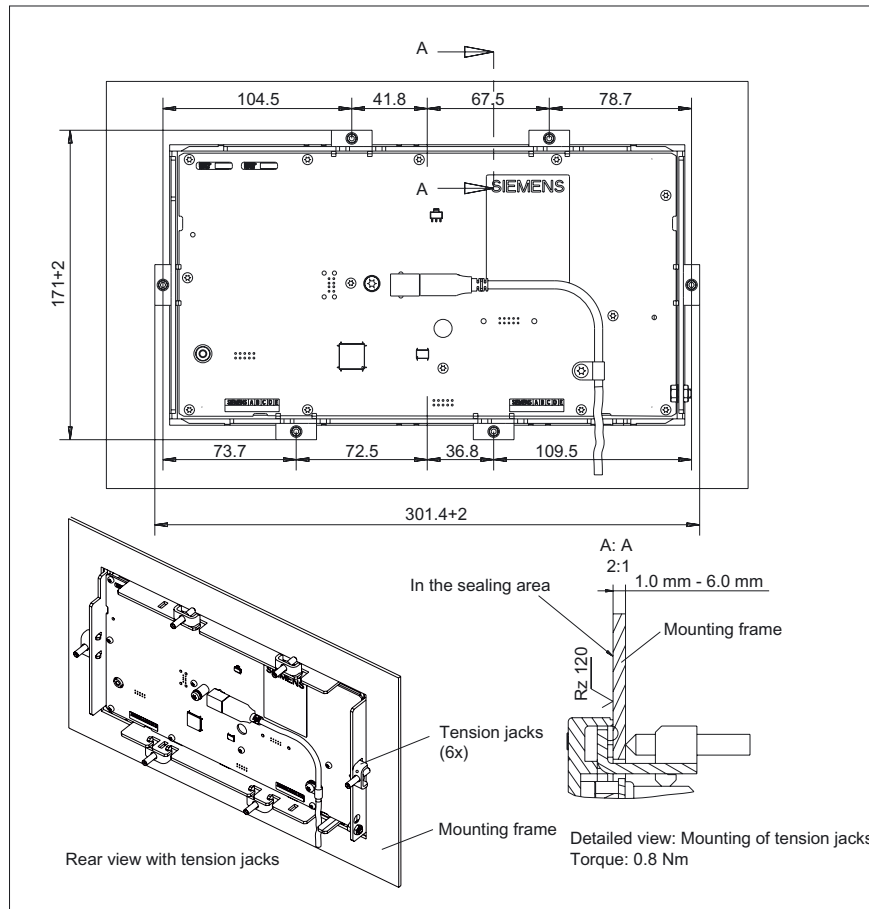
Dimension drawing for mounting the CNC full keyboard KB 310C
